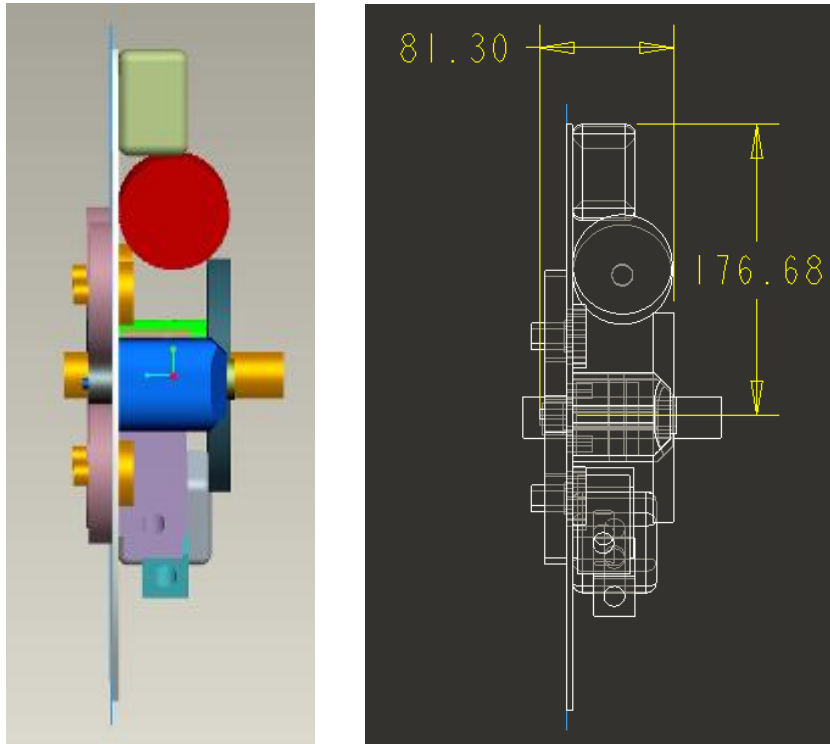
Side view of layout with dimensions in mm: Interior components contained within 3.2" wide and 14" diameter
